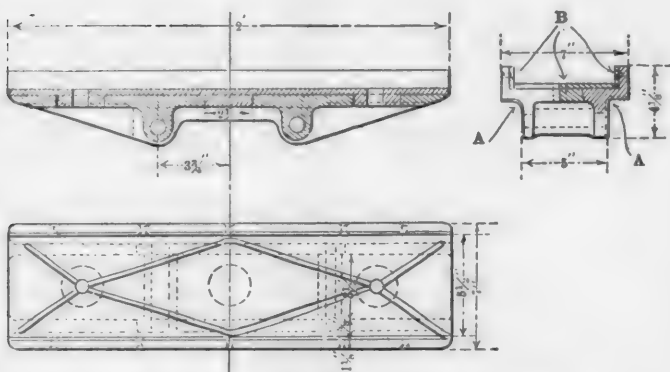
CAST STEEL CROSS-HEAD SHOES.
